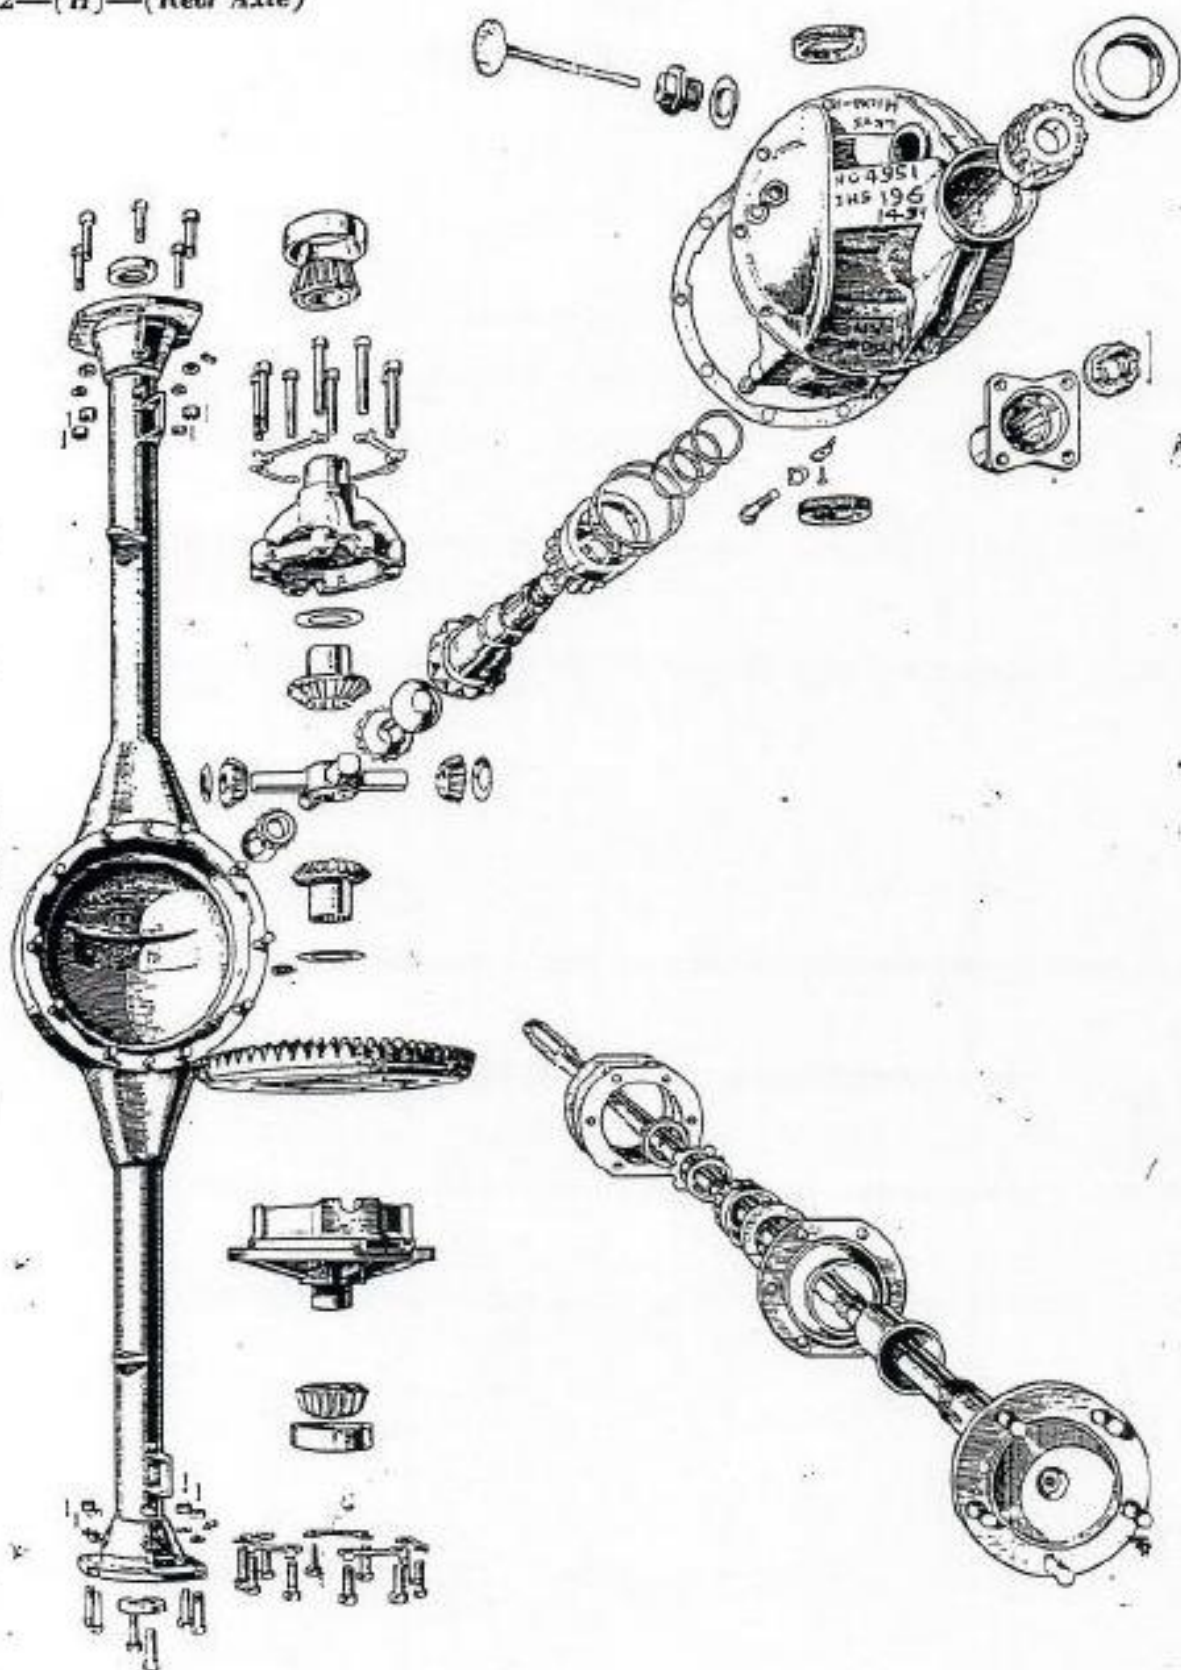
Exploded view of the E.N.V. rear axle assembly.
